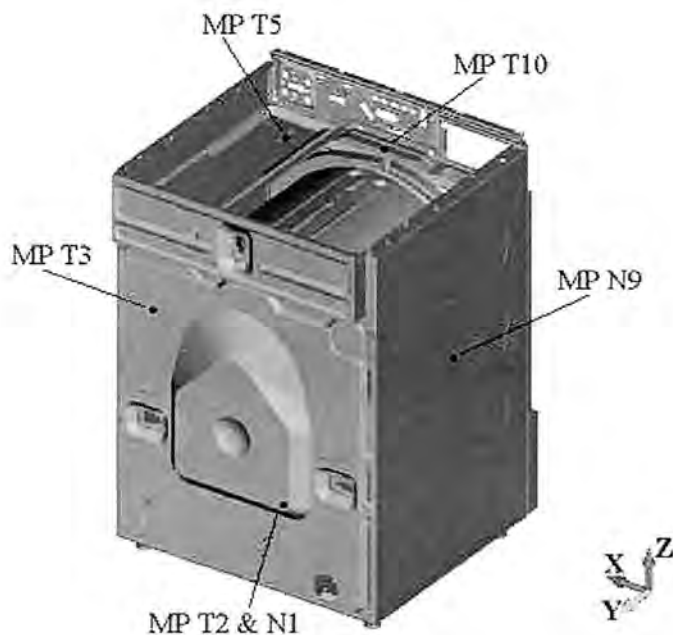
Accelerometer positions pointed out on the entire washing machine, seen from the back and with the lid taken off.
